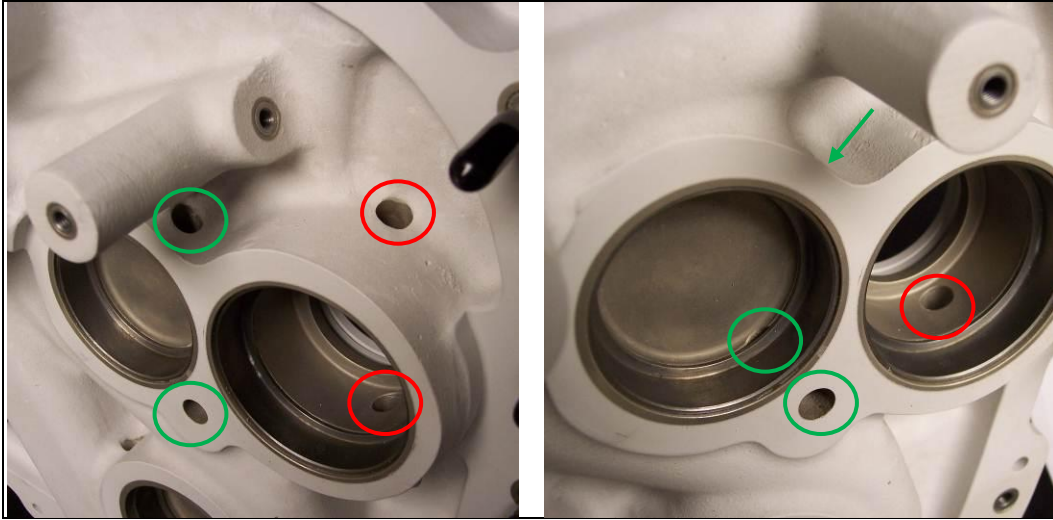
Drainage holes for bearing races on H-47 accessory cover. Drainage holes for recessed bearing races (left) and drainage holes for bearing races with through passageways (right).
